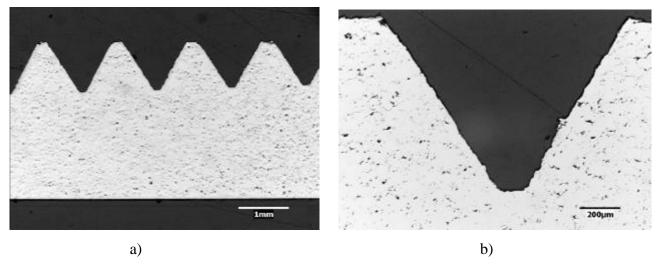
a) View of the Threads in Warm-Compacted Material "B" after Sintering.
